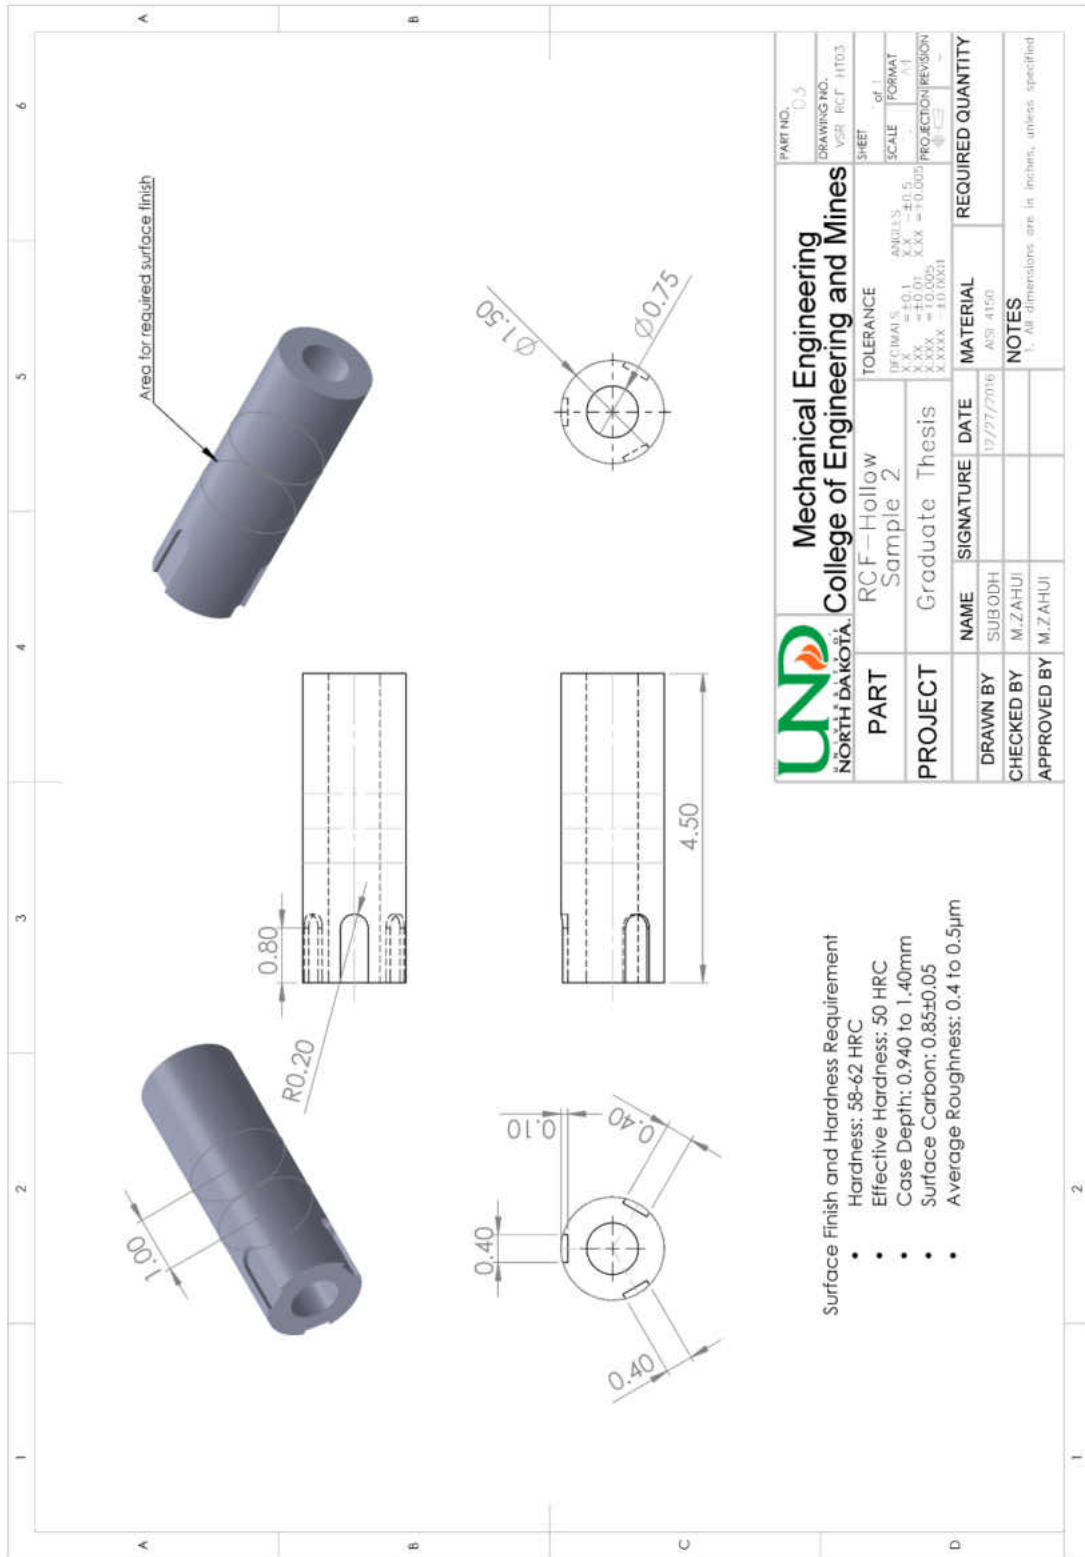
Manufacturing Drawing for RCF Testing of 50% Hollow Specimen.
